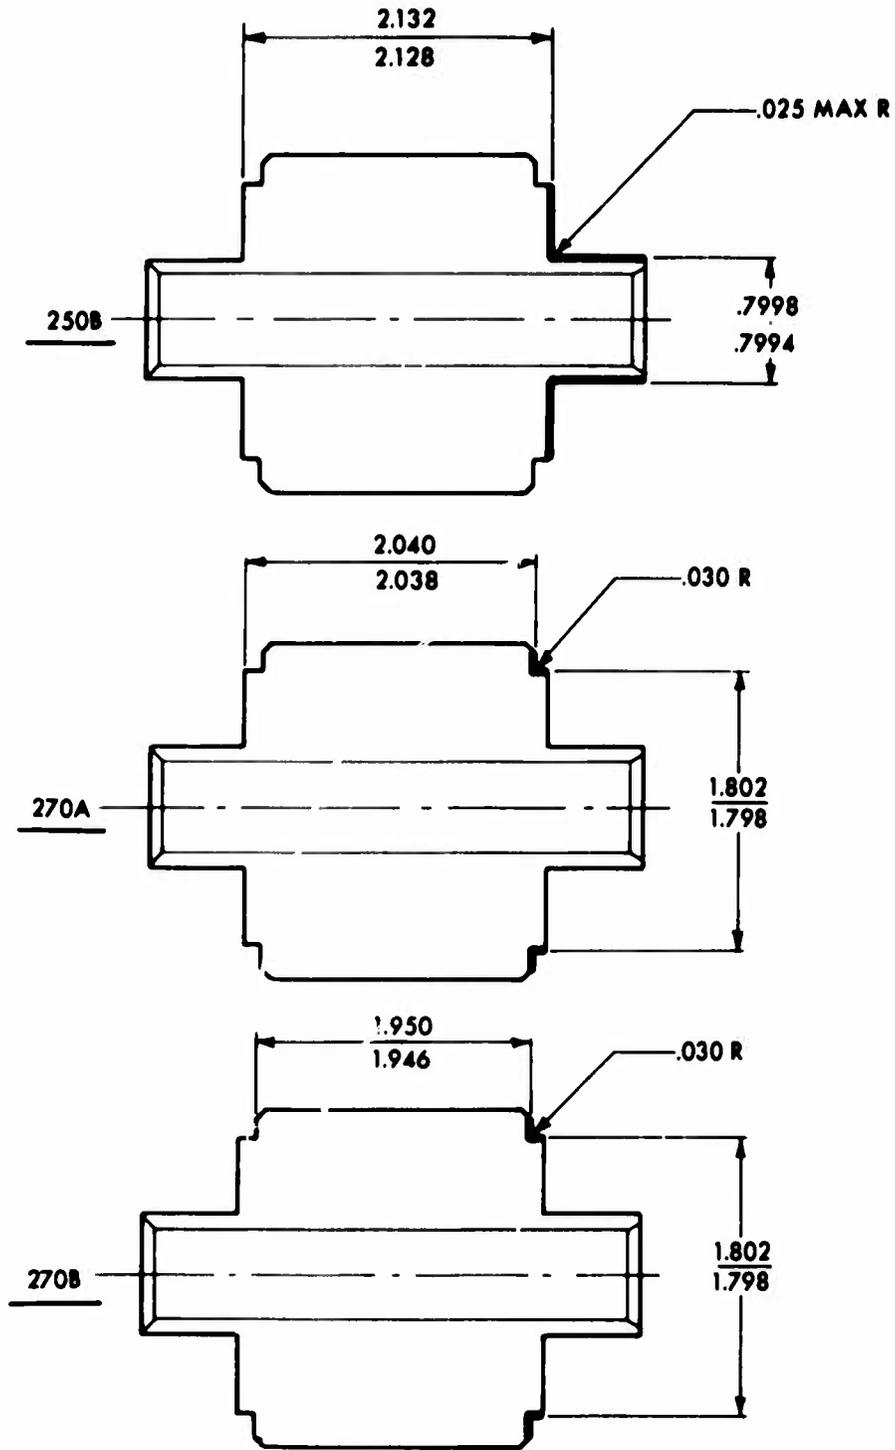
RG351-11182-105, Machine Operation Drawing.
